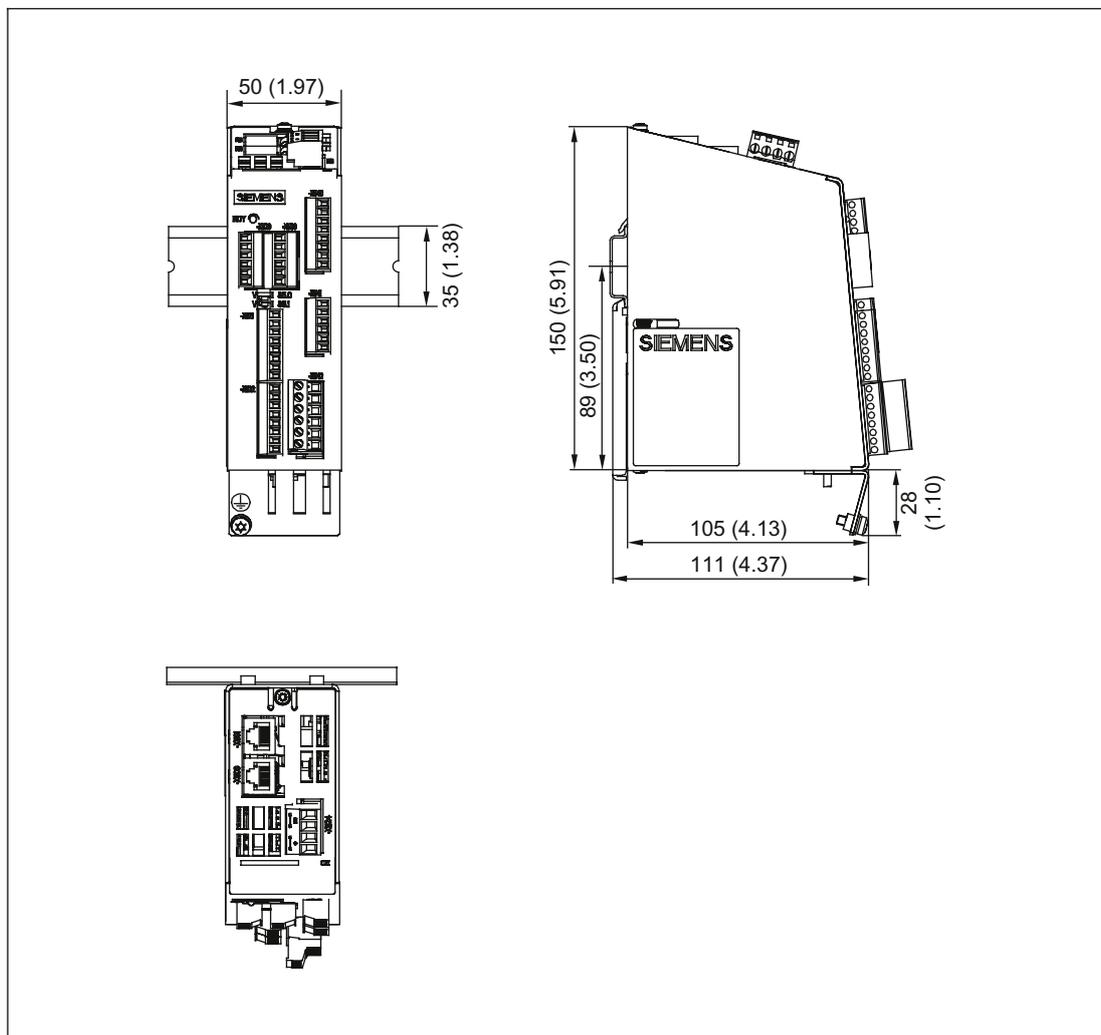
Dimension drawing TM31, order number: 6SL3055-0AA00-3AA0
